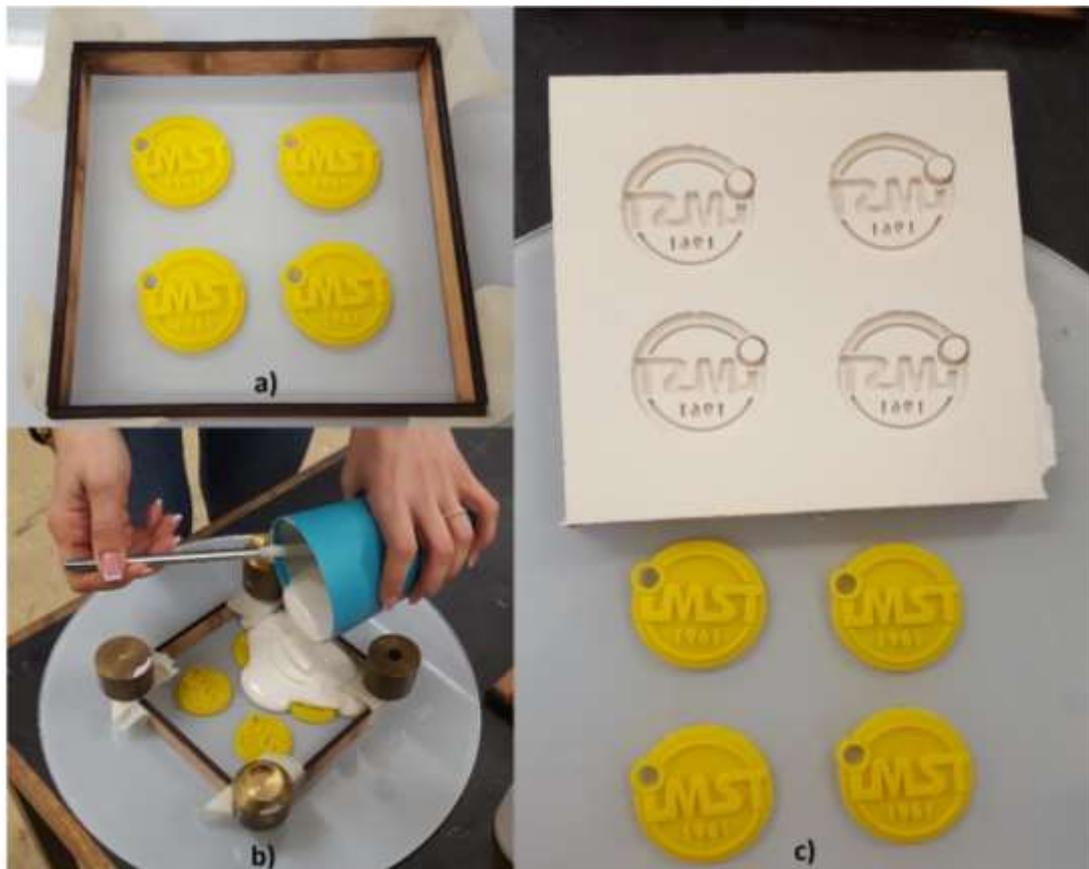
Manufacturing stages of silicone mould for epoxy resin open casting: a) layout of master patterns and bounding mould box; b) degassed silicone rubber pouring; c) final mould with cavities and released master patterns
